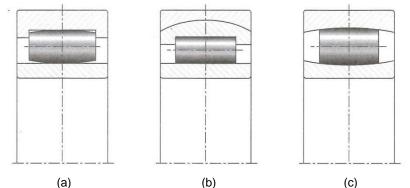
(a) CRB; (b) CRB within a spherical bushing; and (c) toroidal bearing.
